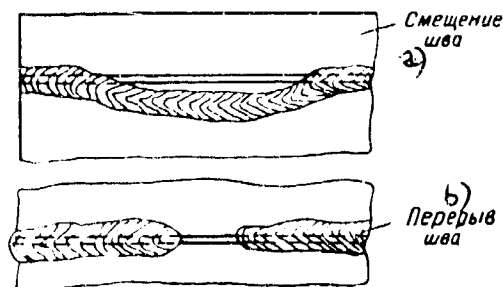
Drift (Displacement) and Break in Seam During Underwater Welding. Key: a) displacement of seam; and b) break in seam.
